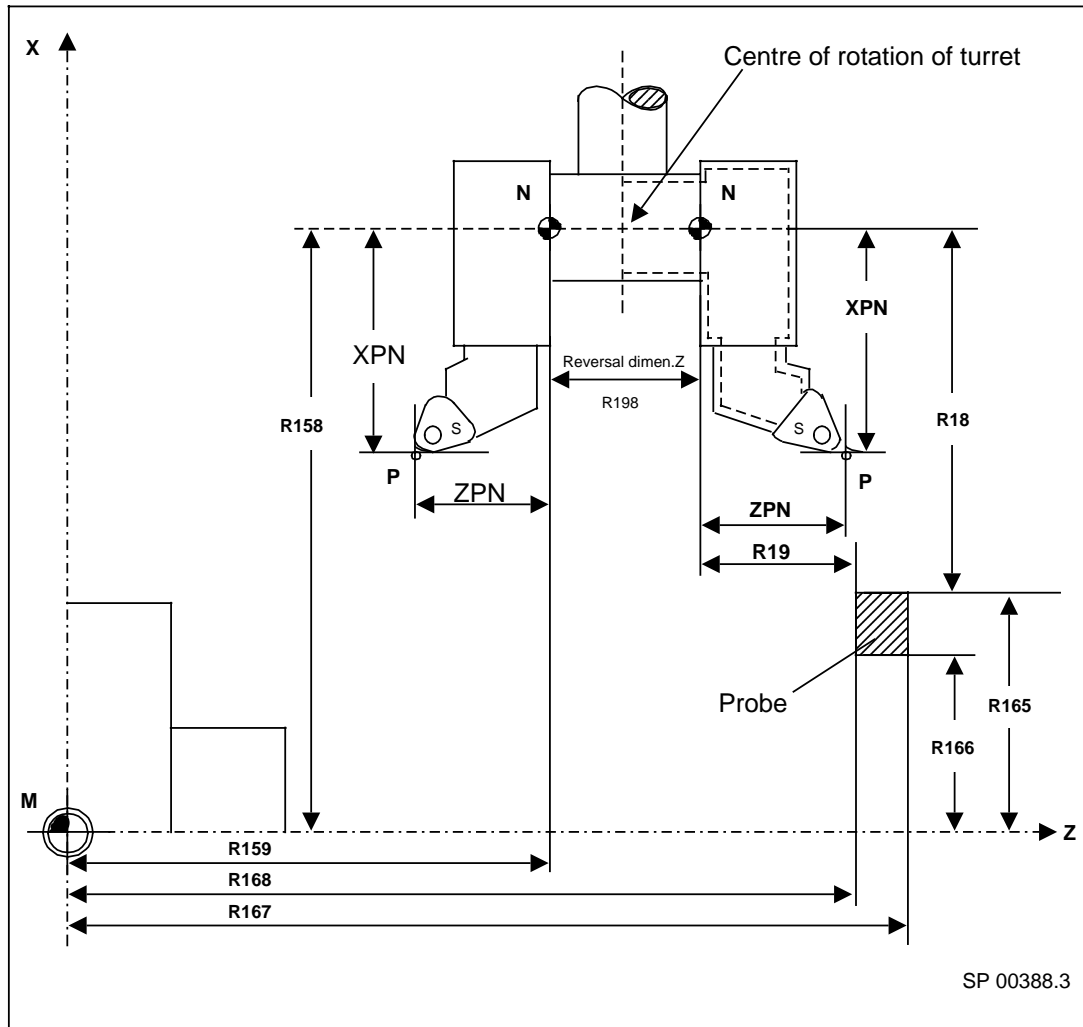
Overview MDC: Tool probe: Calibration tool (Z axis mirrored)
